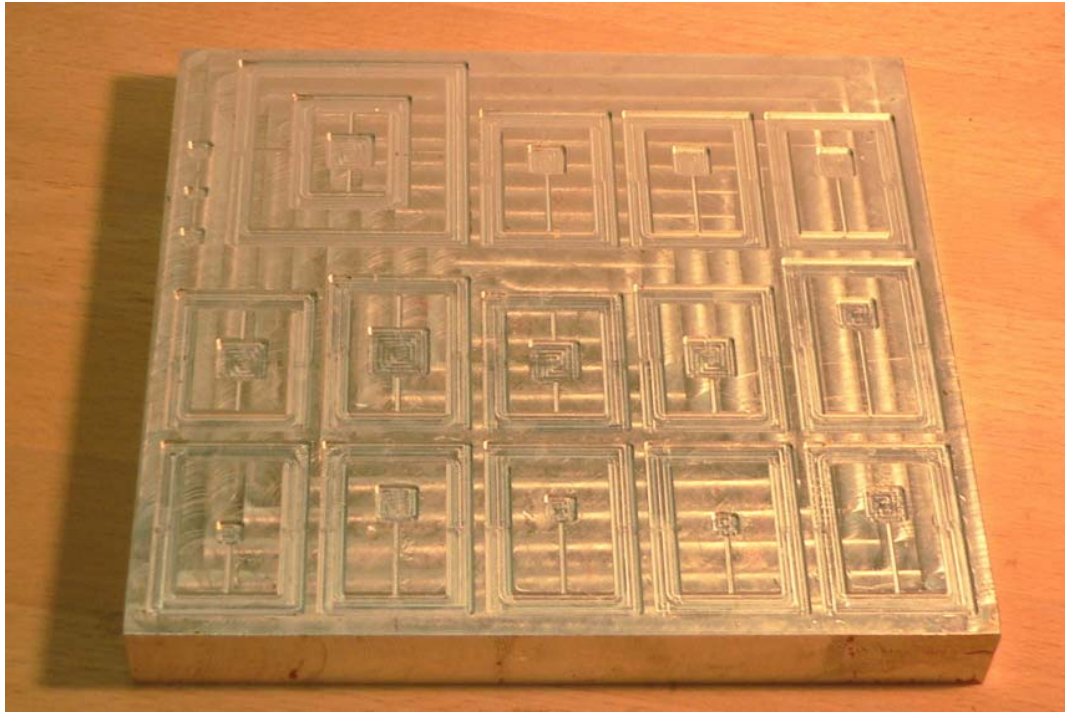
The mold used for the prototypes. It is made by CNC machining of an aluminum block.
